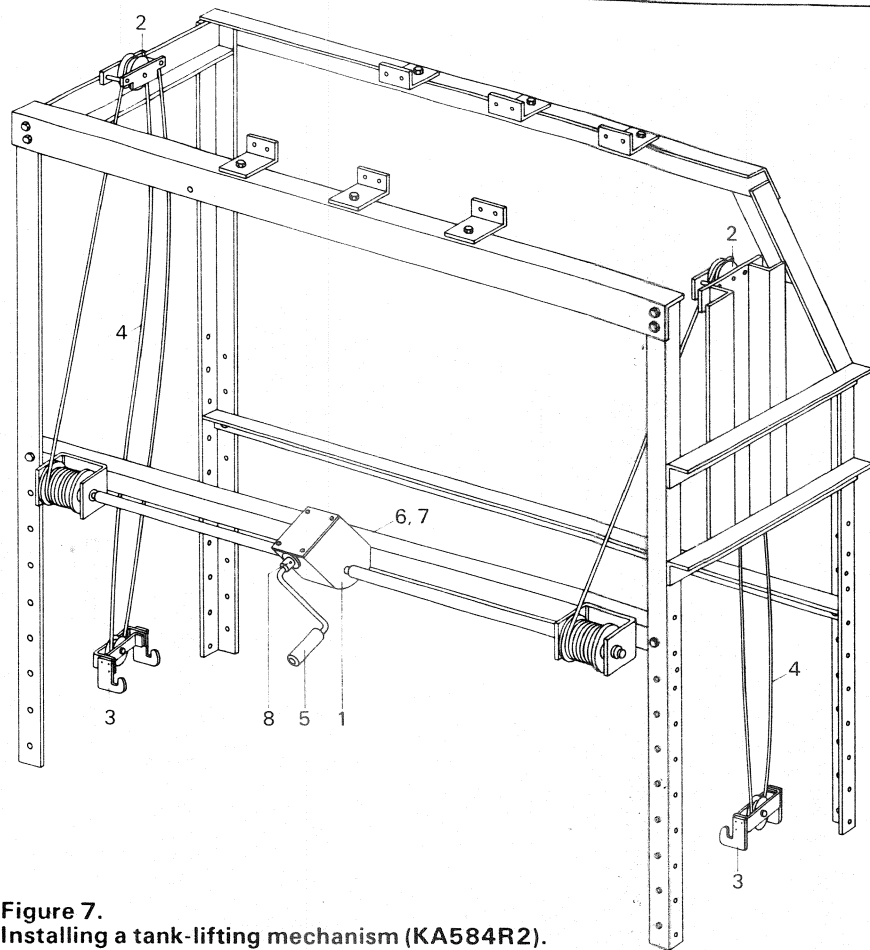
Installing a tank-lifting mechanism (KA584R2).
